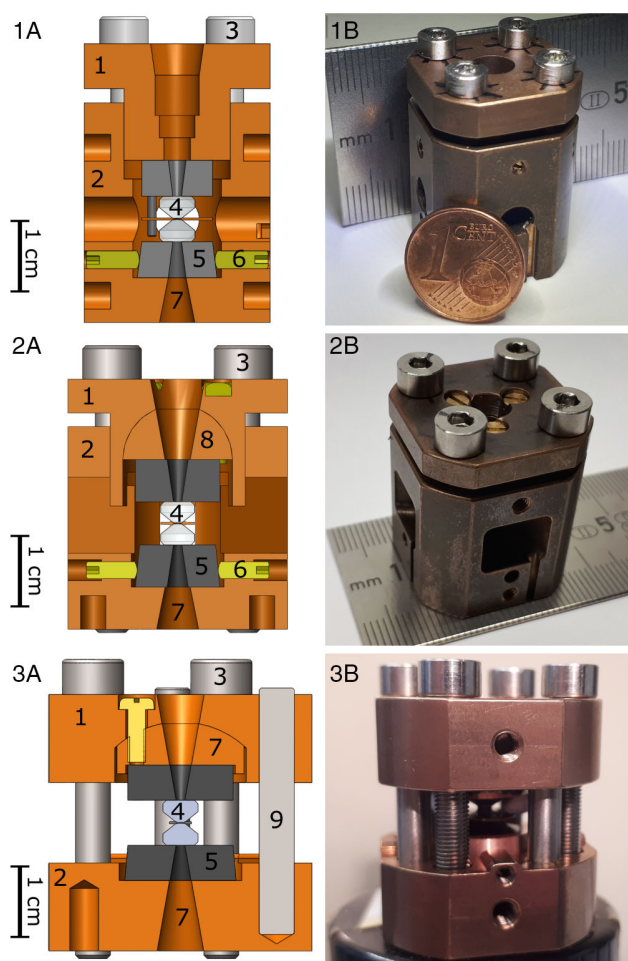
Three diamond anvil cell (DAC) designs. A) Depiction of the cross-section. B) Photograph of the assembled DAC. 1A, 1B: Smallest cell with a piston-cylinder fit between the upper cell body (1) and the bottom cell body (2). M3 titanium screws (3) apply the load which is transmitted to the tip of the diamond (or moissanite) anvils (4) glued on top of tungsten carbide (WC) anvil seats (5). Aligning screws (6) are used to adjust the relative xy position of the anvils. A conical aperture in the cell body (7) provides access to the back of the anvils from both sides. 2A, 2B: Larger design with the same piston-cylinder fit, where M4 screws (3) are used to apply the load. Here, a hemispherical rocker (8) permits a tilt alignment between the anvils. 3A, 3B: The design is similar in size as the previous one also using M4 screws (3) with an improved hemispherical rocker (7). Here, a system of three titanium guide pins (9) is used to keep the two parts of the cell body parallel with respect to each other.
